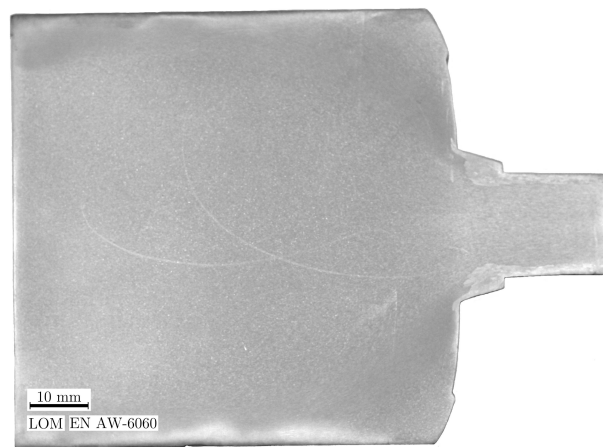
Etched cross section of a partly extruded billet of EN AW-6060. Underlying LOM image by courtesy of the Institute of Forming Technology and Lightweight Construction (IUL), TU Dortmund University.
